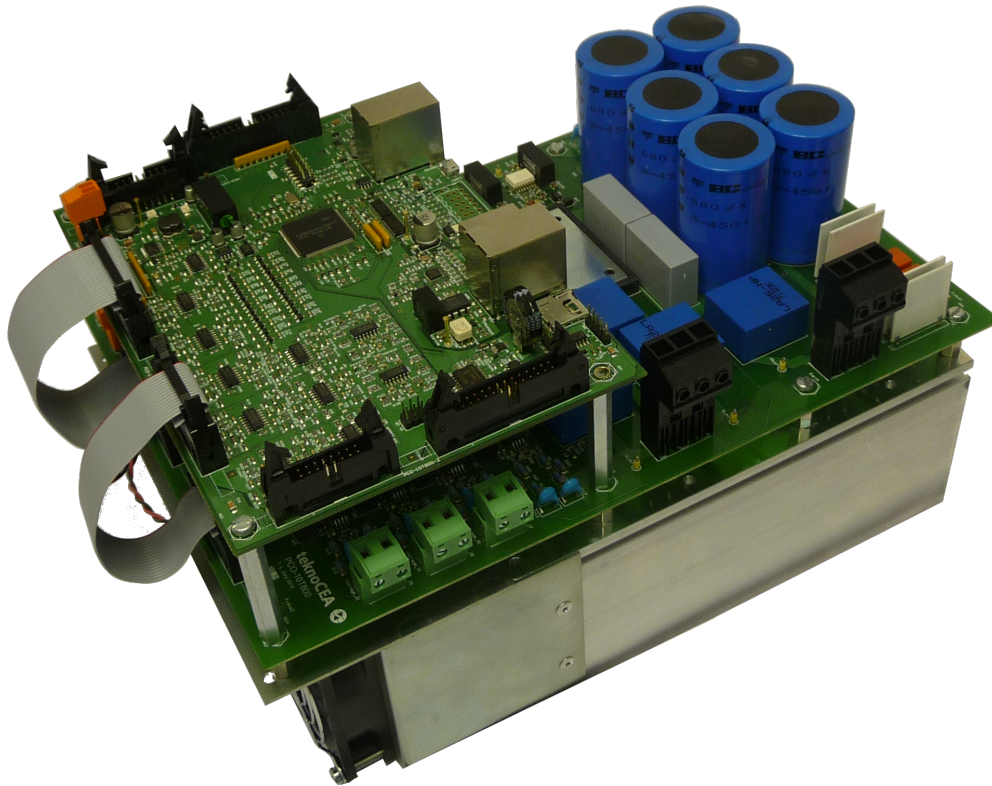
CDA01-CU3 and PCO-10T800 assembly.
